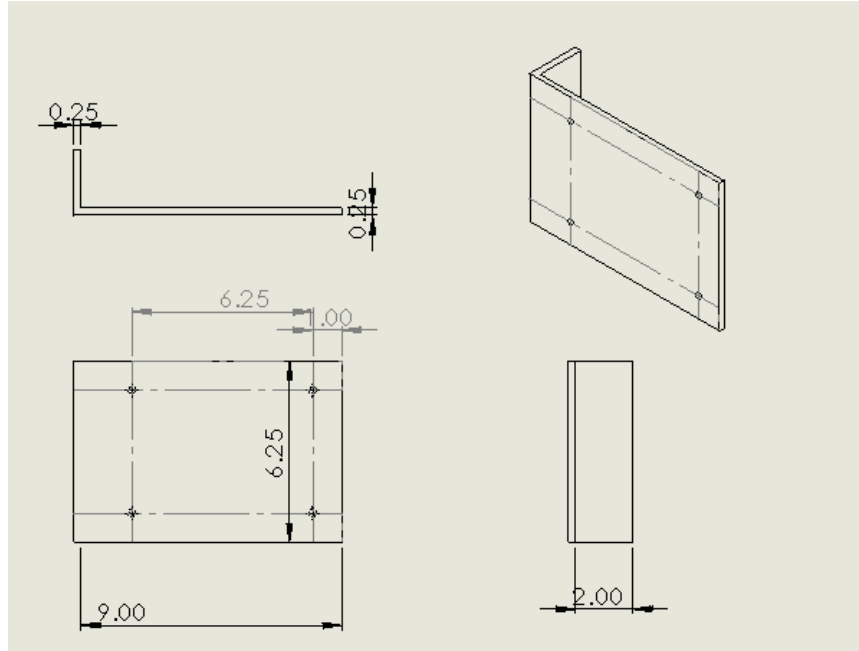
Schematic of steel plate used to create jig used for annealing of specimens of 152mm wide PMMA specimens. Two of these plates, four screws, and four nuts, are needed to create a single jig. The four holes that hold the screws are located 152mm apart to align the pieces together.
